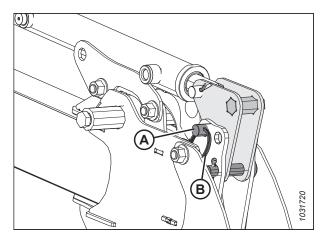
Fore-Aft Cylinder Adjustment Type 1 – Aft Position
